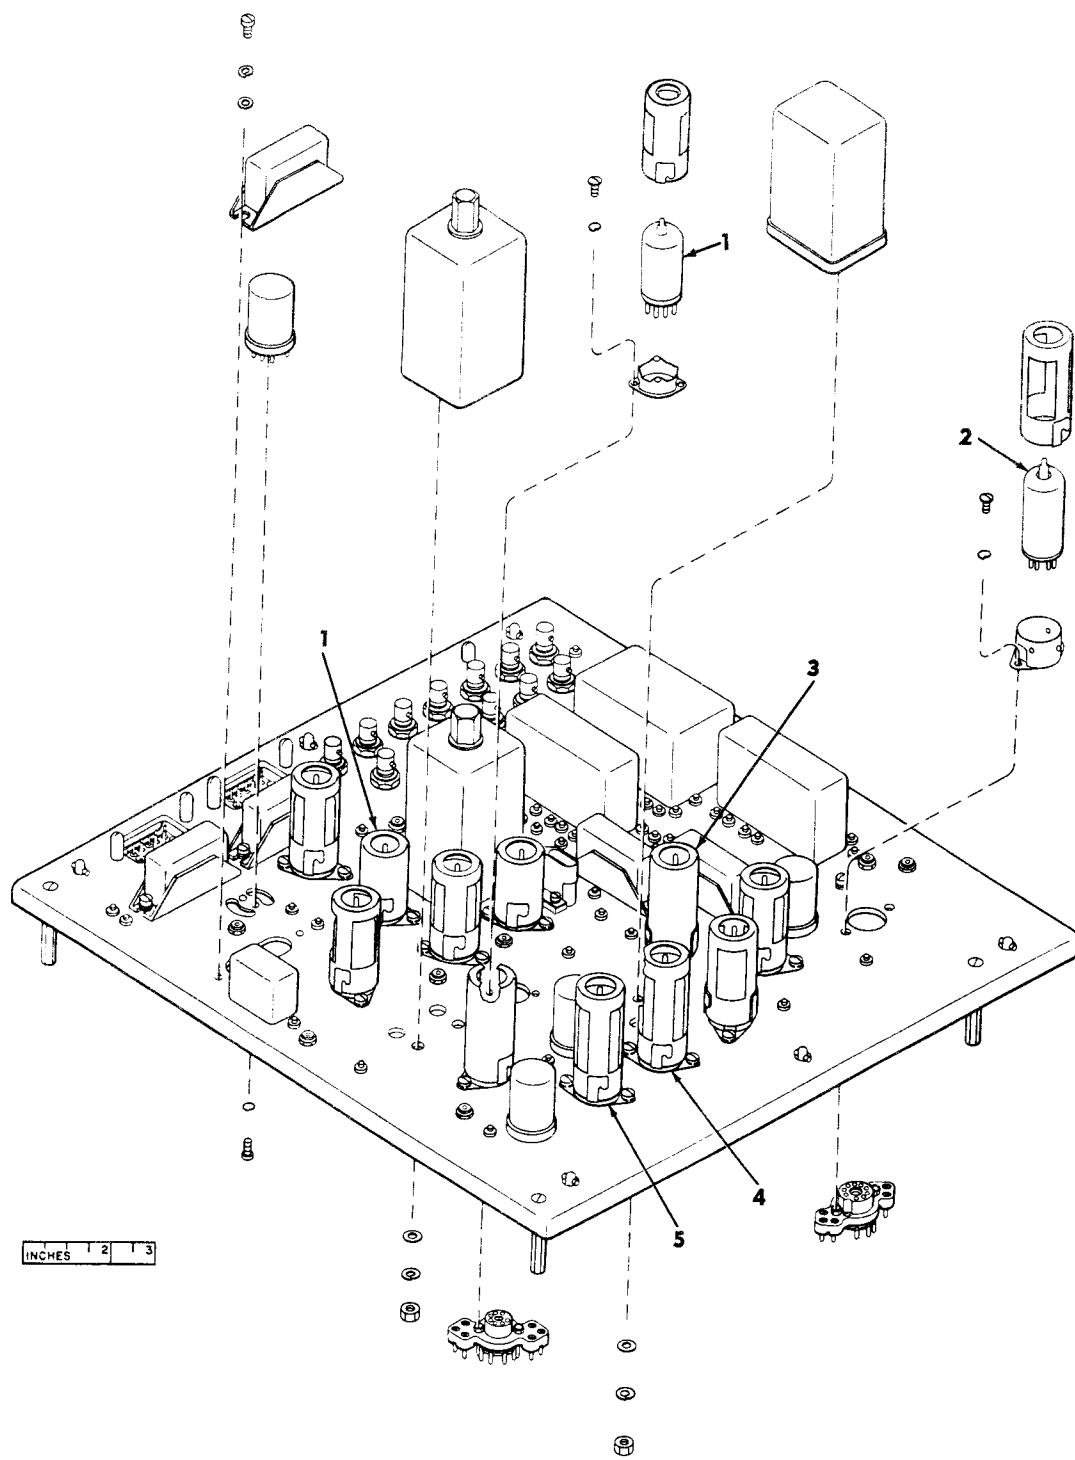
Synchronizer, electrical (9983715)—partial exploded view
